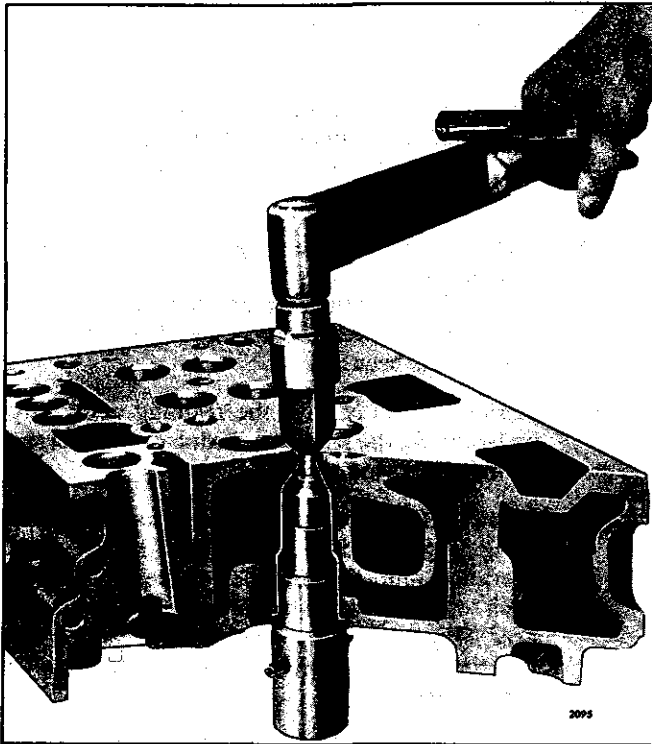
Upsetting Injector Tube Using Tools J 5286-4A and J 5286-6
